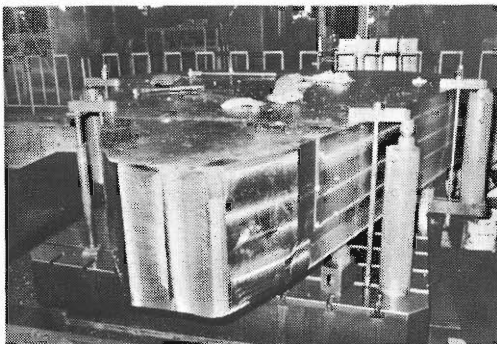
Pole plate of the first magnet during machining using NC-machine.
